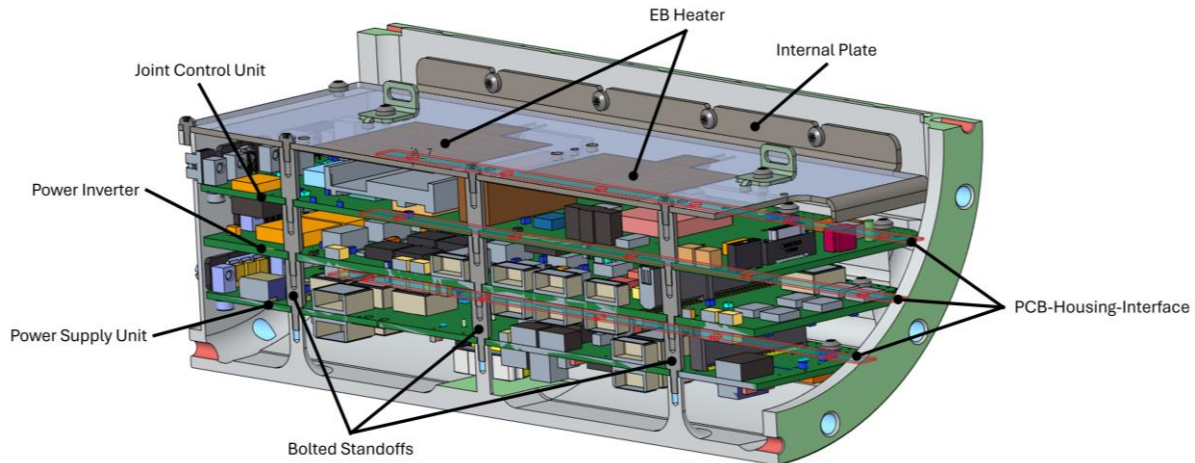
EB half cutaway highlighting the split housing, PCB stack, and key thermal interfaces.
